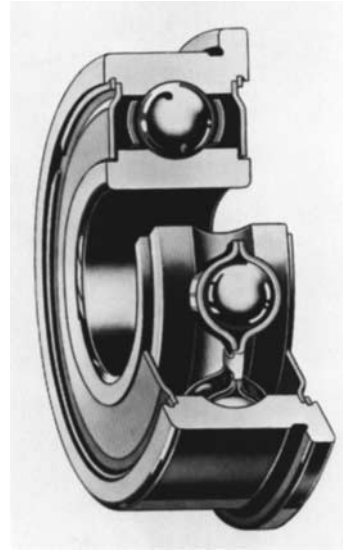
Shielded, flanged, deep-groove ball bearing. Shields serve as dirt barriers; flange facilitates mounting the bearing in a through-bored hole. (The Barden Corporation.)
